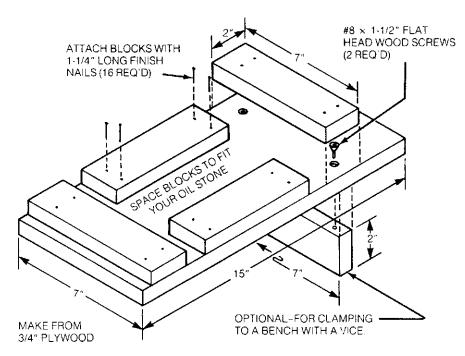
Construction details of an oil stone holding fixture that clamps to a bench.
